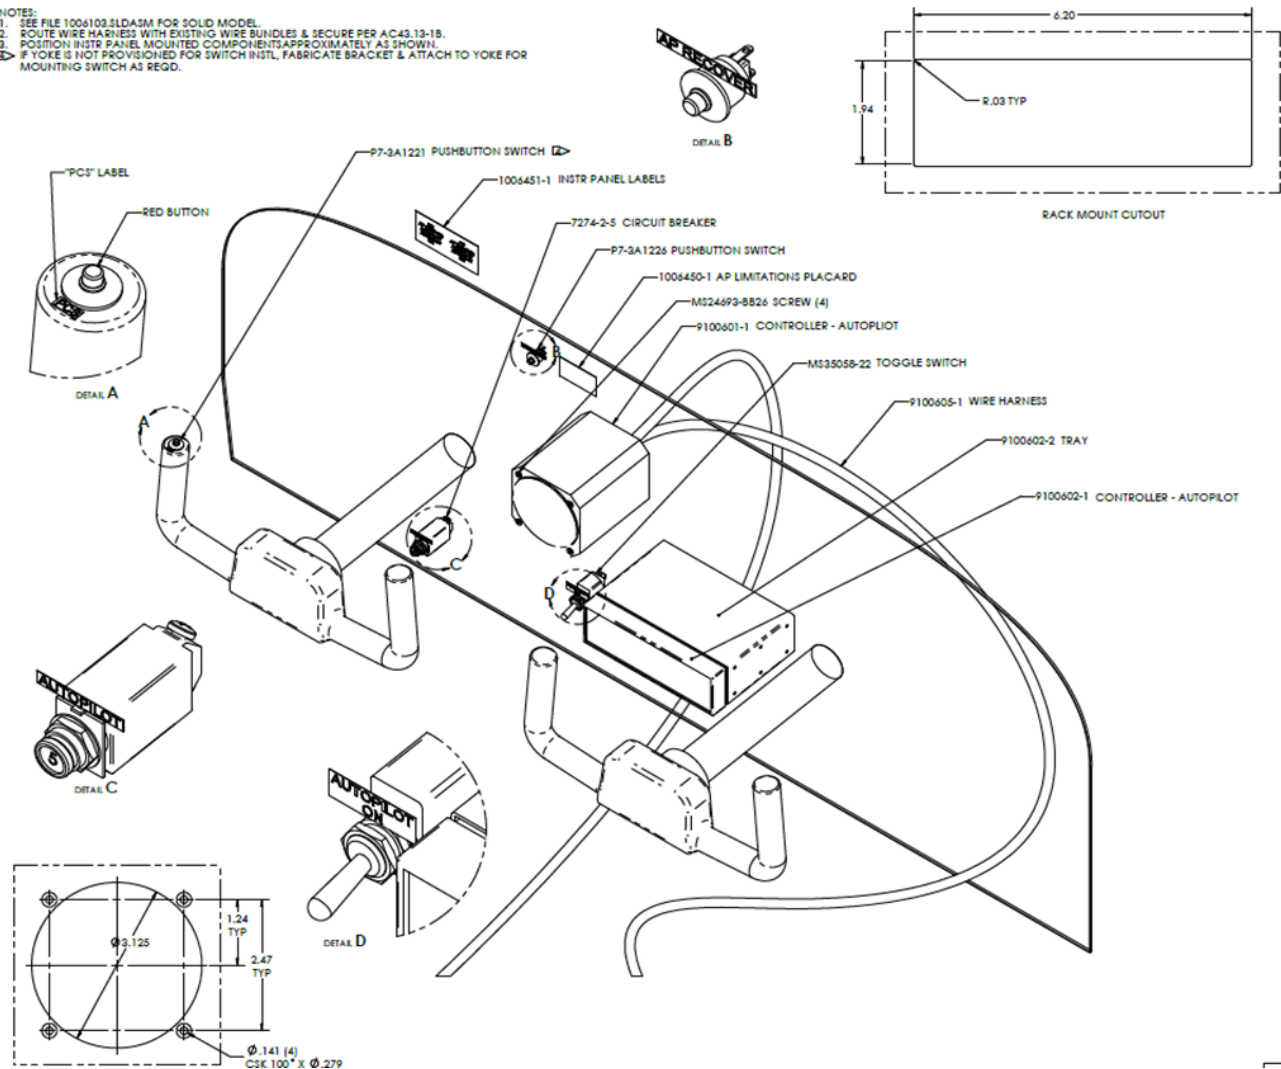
TYPICAL COCKPIT INSTALLATION
